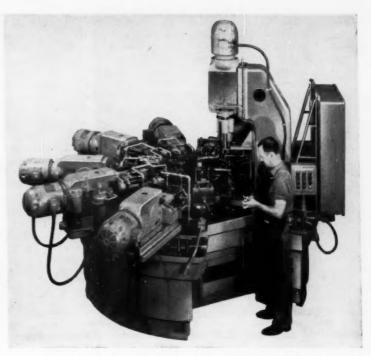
Multiple-unit automatic for processing forgings for fuel injectors built by Kingsbury Machine Tool Corporation
